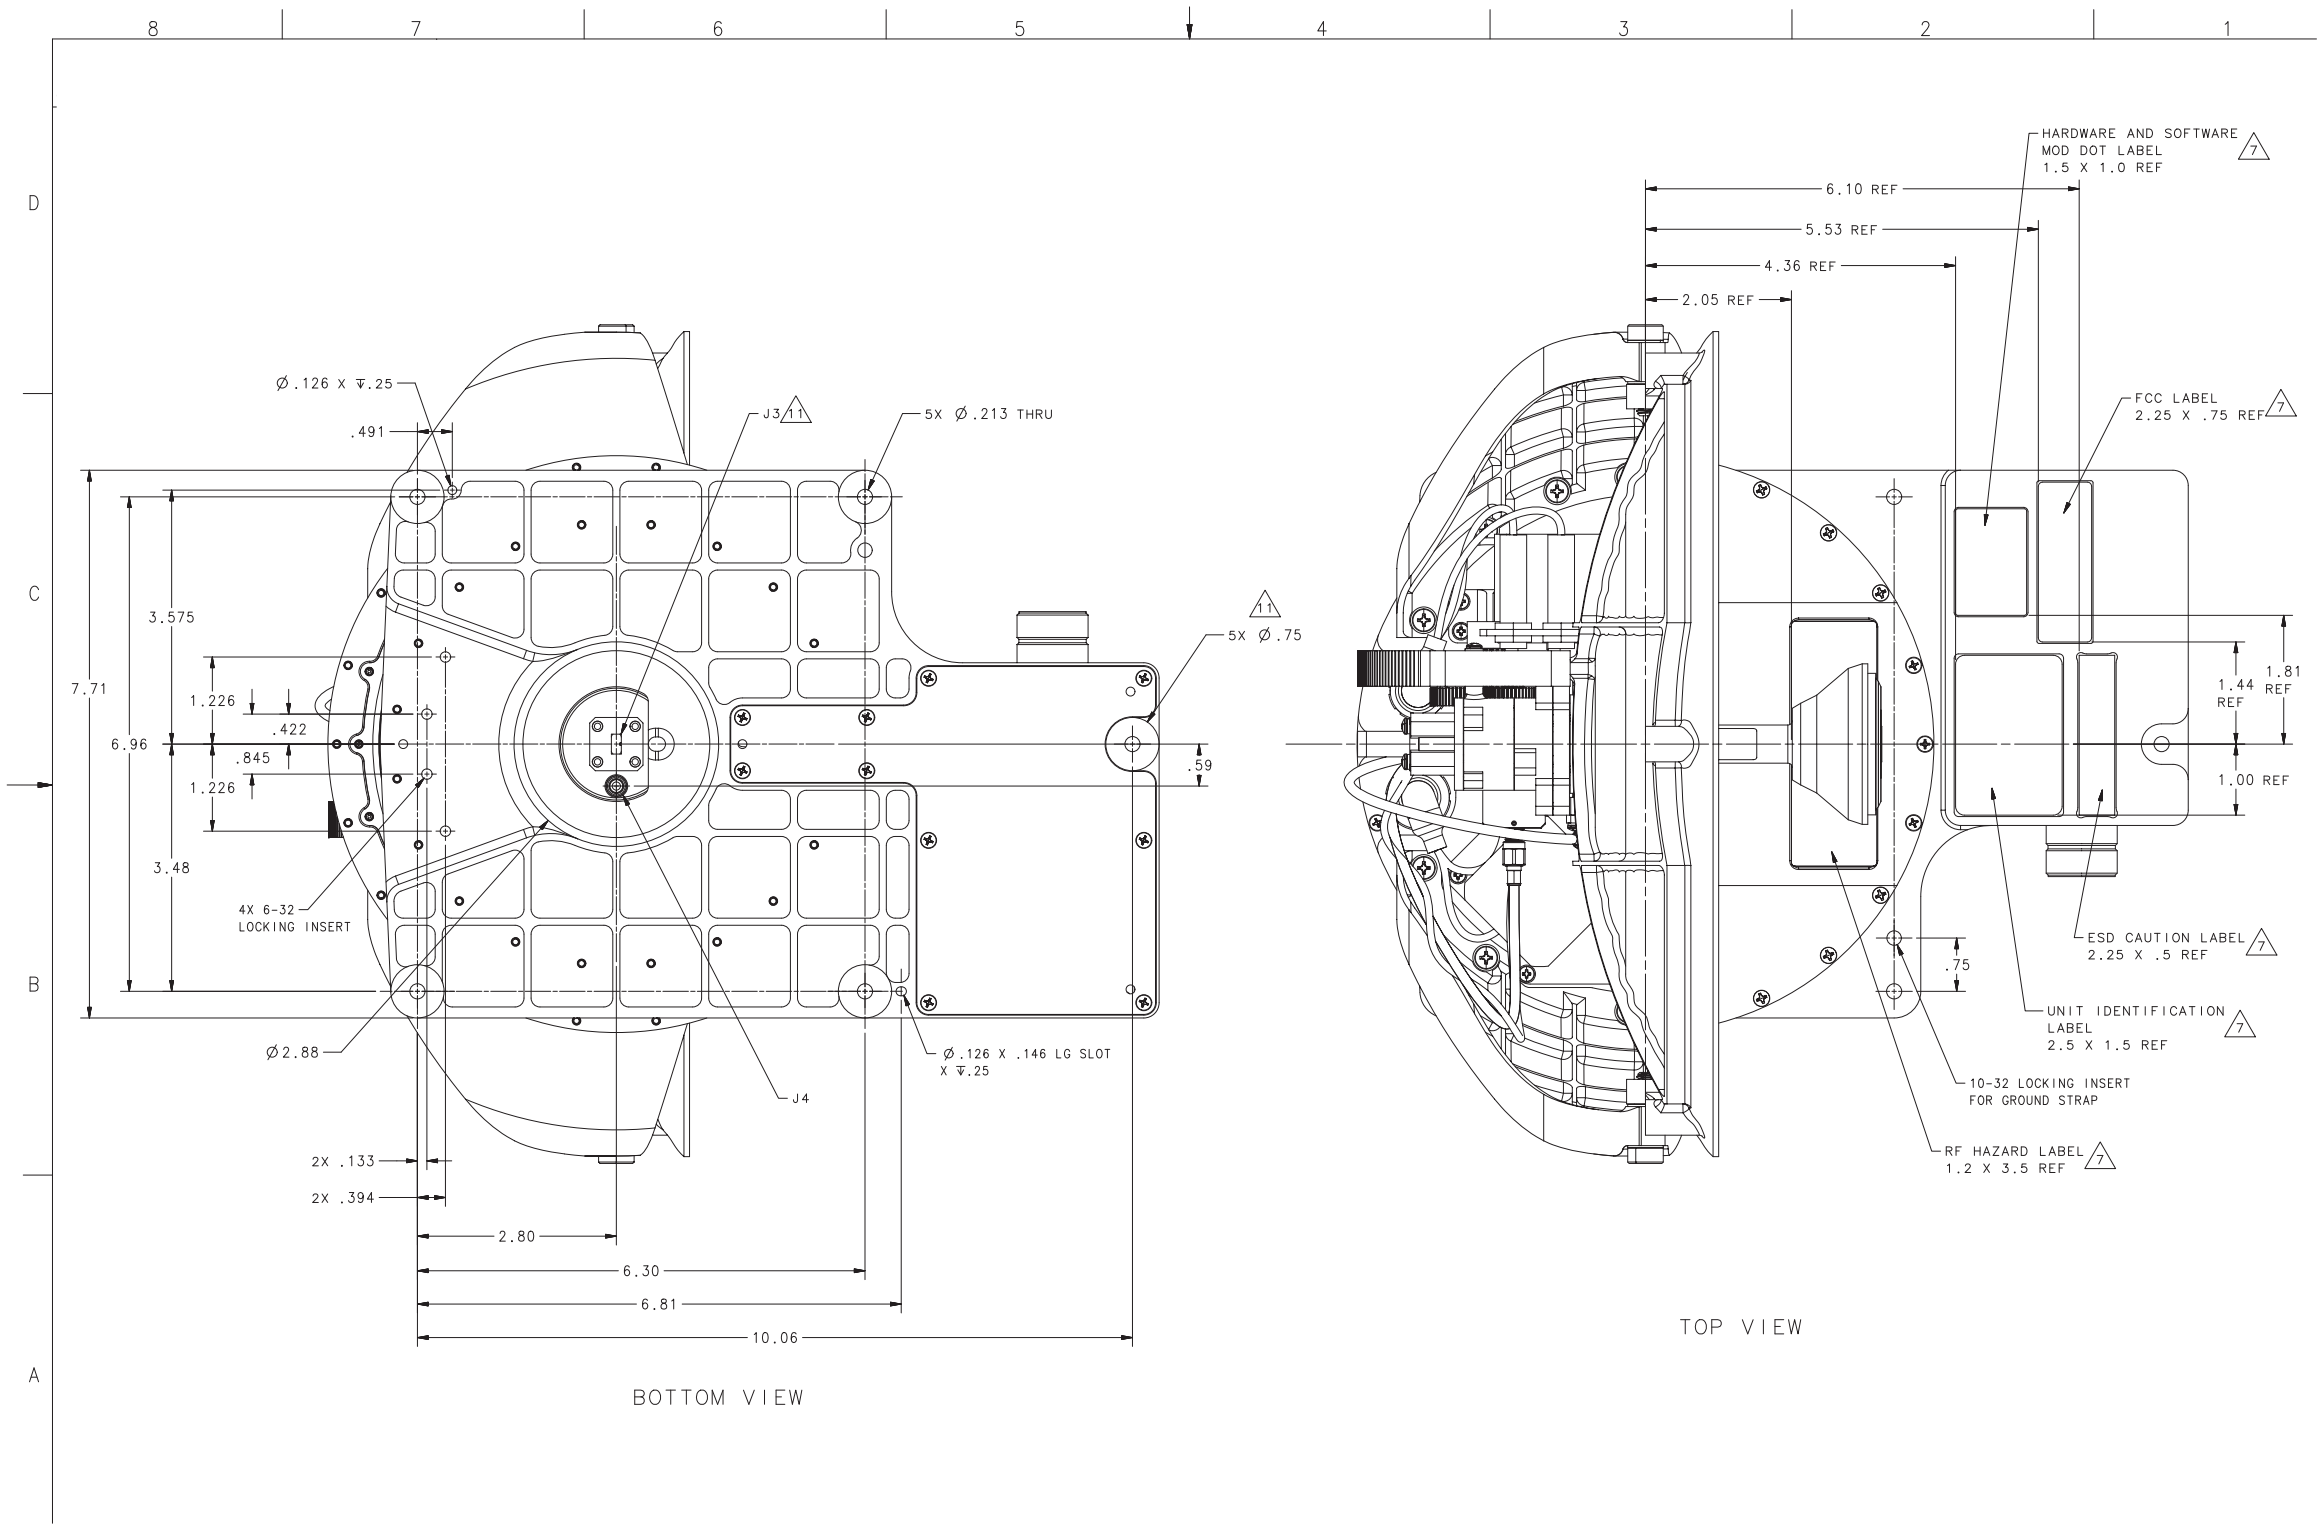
TMA Outline and Installation Drawing (Sheet 4 of 4)
